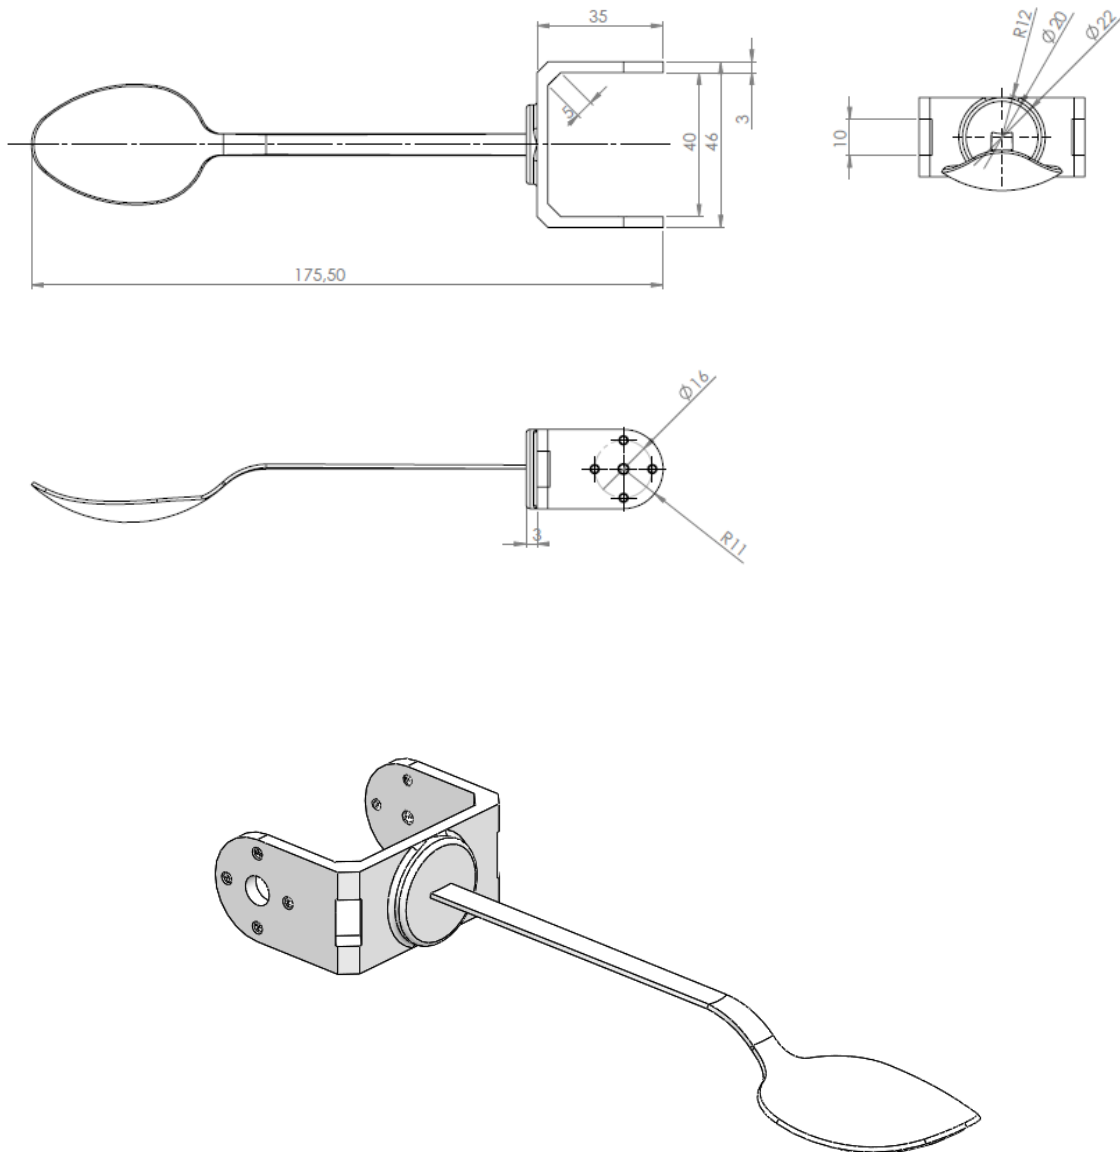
Technical Drawing and Trimetric Views of the Spoon End-Effector
